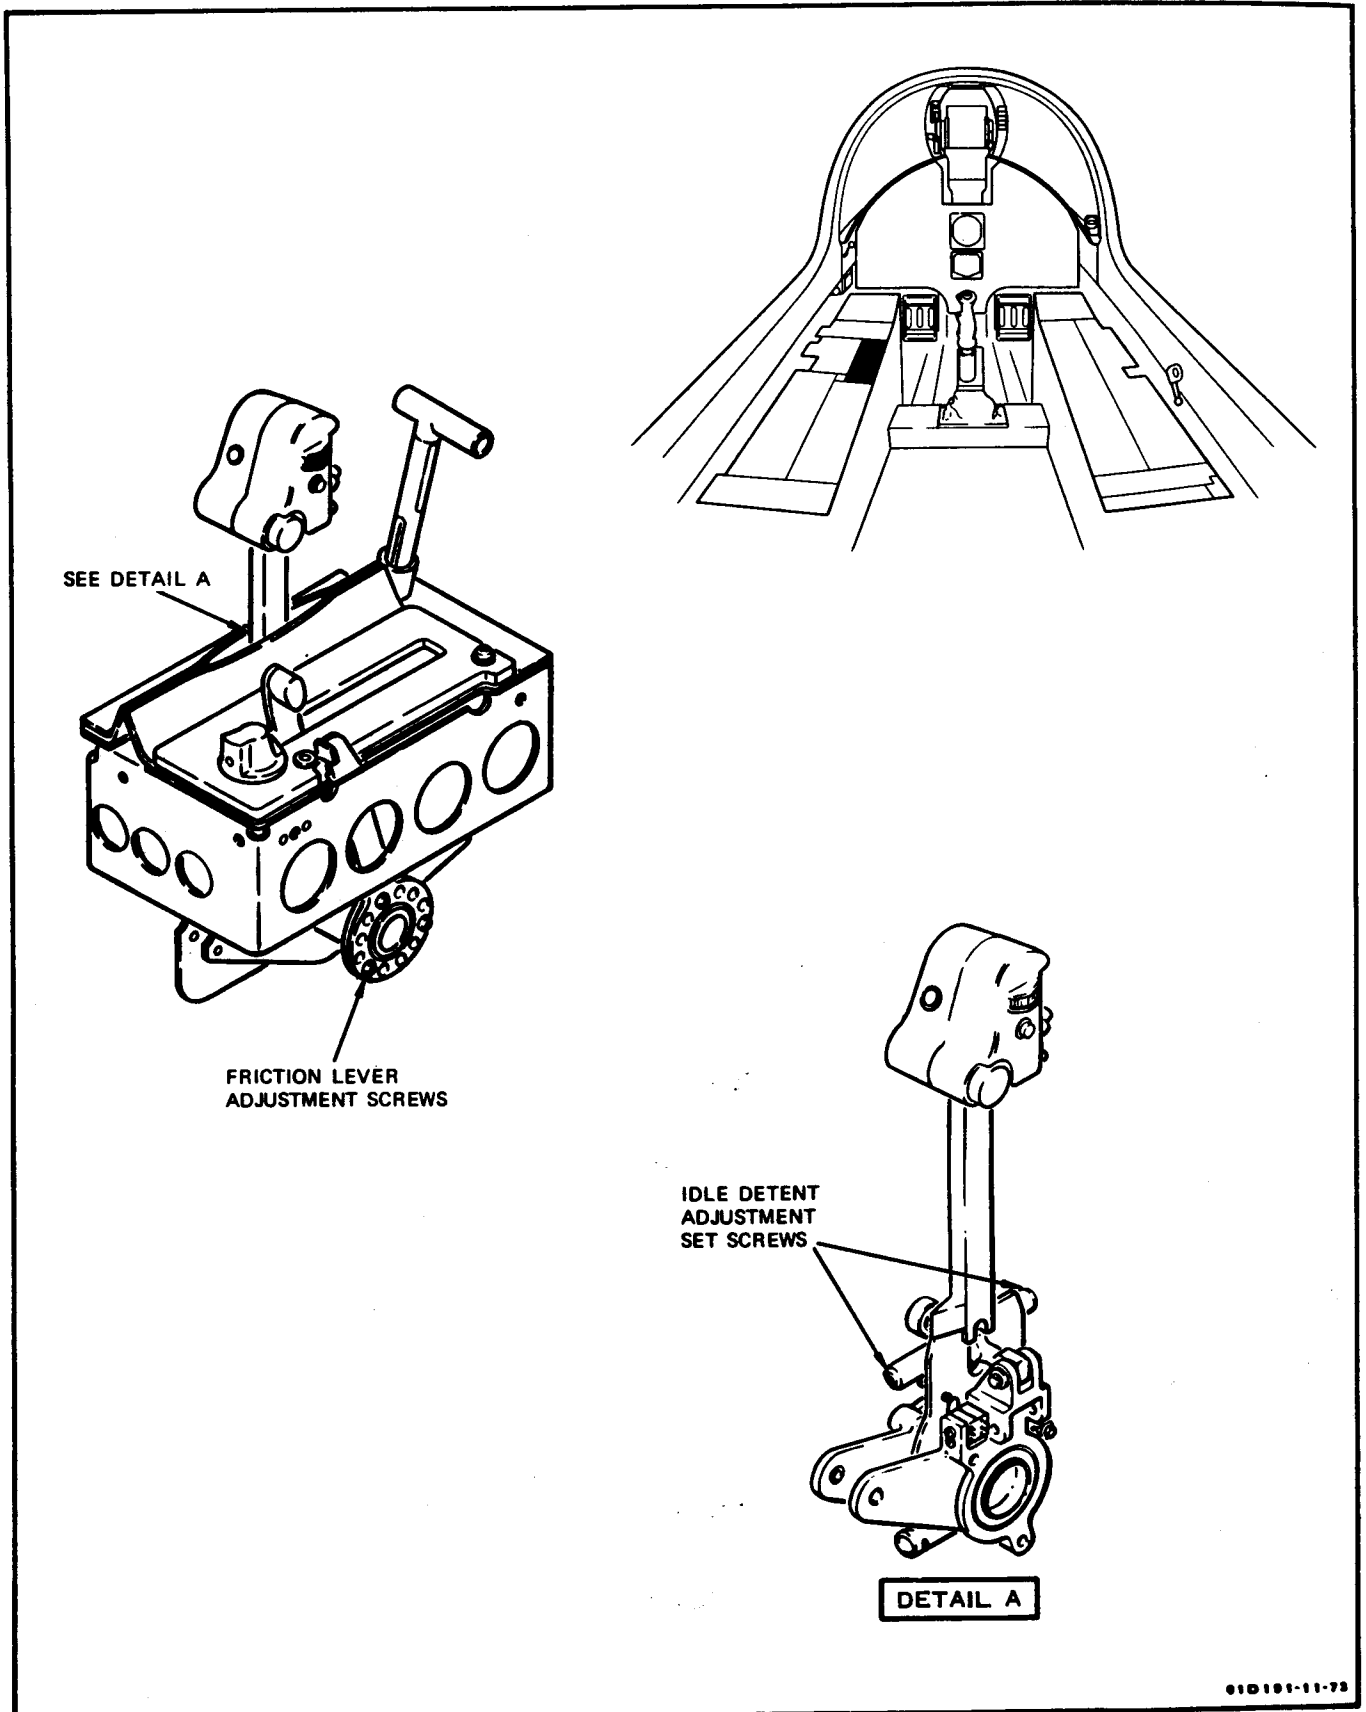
Throttle Friction Lever and Idle Detent Adjustment
